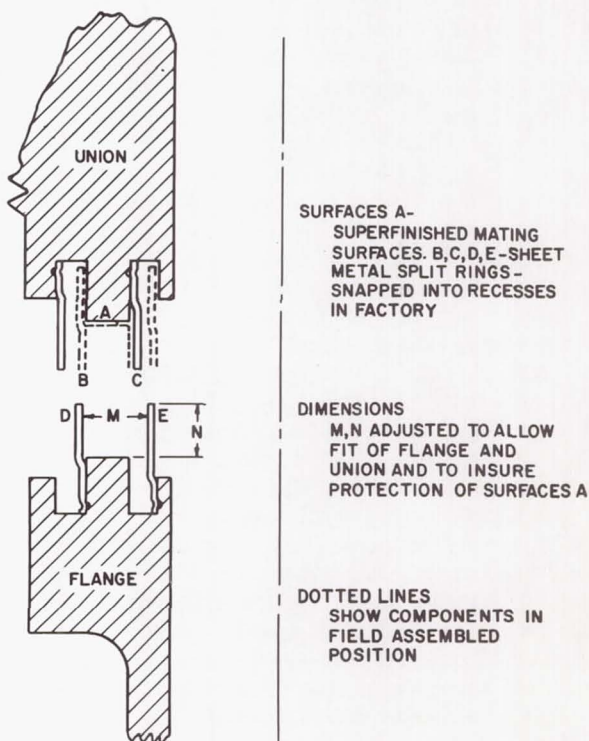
A Method of Protecting Fine Finished Connector Components.
